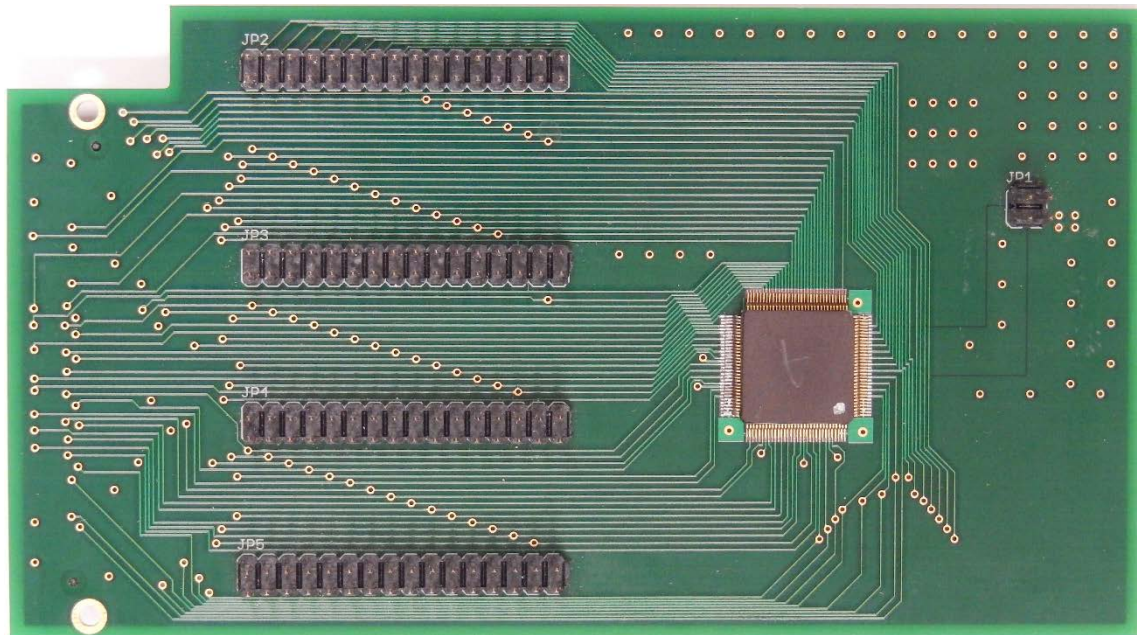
Package for H3's heterogeneous core pair, surface-mounted onto its 4-layer PCB. Underside of PCB has the FMC LPC connector for attaching the PCB as a mezzanine card to the Xilinx ML605 FPGA board.
